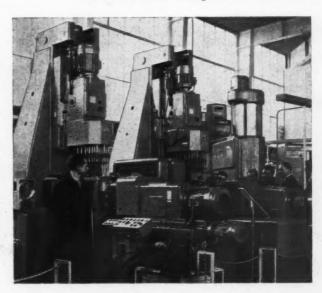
General view of a 3-station transfer machine for drilling and tapping operations on cast aluminium tractor gearboxes, and on certain cover castings. Standard unit heads and other components are employed
